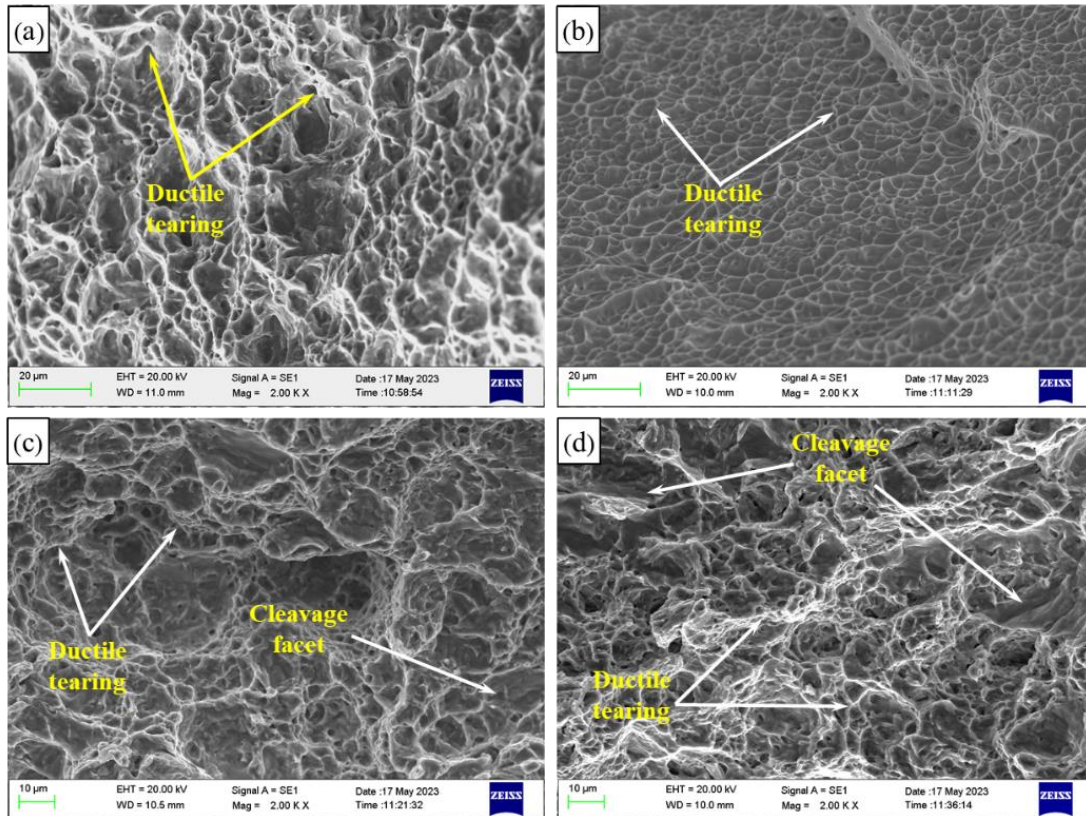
SEM micrographs of fractured reduce-section tensile specimens of as-received materials and dissimilar weld: (a) as-received CP-Ti; (b) as-received Ti-6Al-4V; (c) welded using conventional-GTAW; (d) welded using pulse-GTAW at 5Hz
